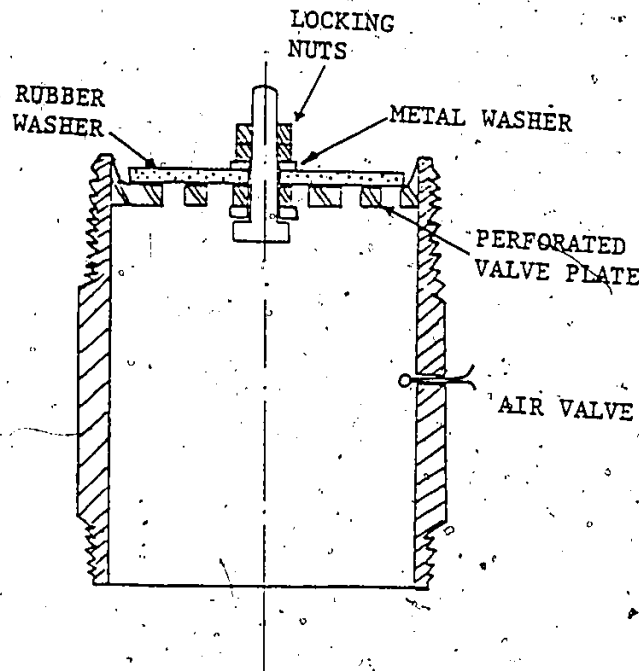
DELIVERY (CHECK) VALVE ASSEMBLY FOR THE LOCALLY MADE HYDRAM
